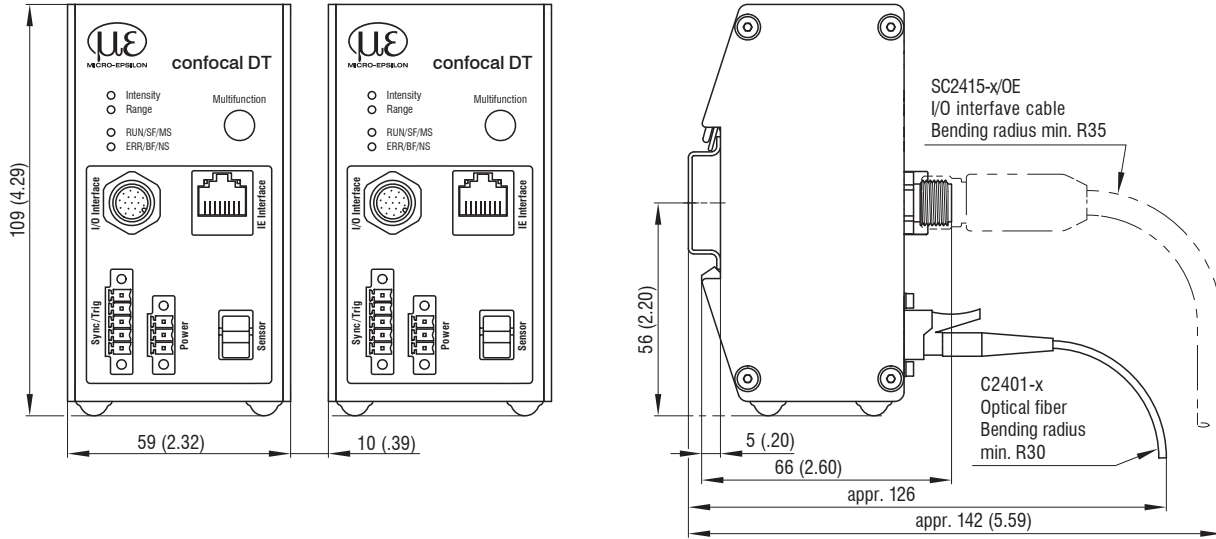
IFC2411 dimensional drawing, dimensions in mm
